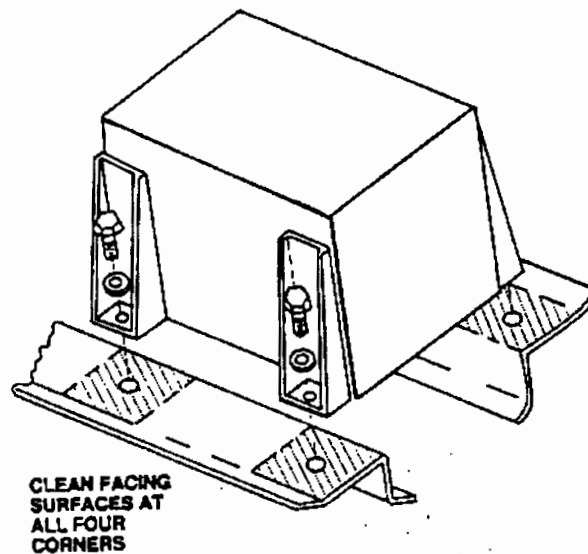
TYPICAL METHOD OF BONDING EQUIPMENT FLANGES TO FRAME OR RACK
